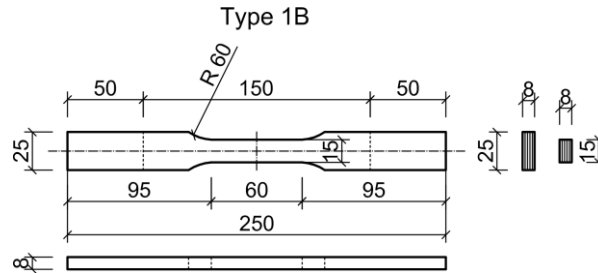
Nominal dimensions of Type 1B specimens used for the tensile tests (mm).
